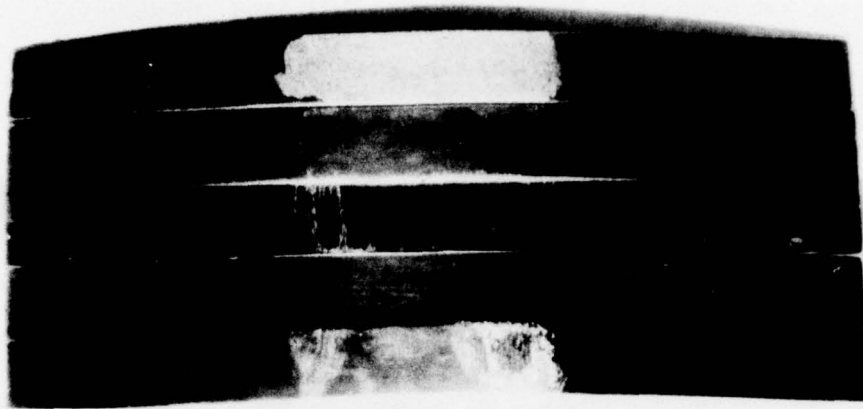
shows the typical appearance of stress corrosion specimens mounted in the holder. After stripping the chromium-molybdenum coating in hydrochloric acid, the specimens were cleaned, chemically polished, and inspected for cracks using both visual and fluorescent penetrant techniques. Figure 26 shows the appearance of several specimens tested at 413.4 MN/m² (60 ksi). The cracks were readily visible after fluorescent penetrant processing when examined under ultraviolet light. Tables 14 and 15 summarize the results of these tests. Referring to Table 14 the uncoated alloy had, as expected, a threshold stress for cracking somewhere below 275.6 MN/m² (40 ksi). Plating this alloy with chromium-molybdenum improved the HSSC resistance so that the threshold stress was raised to above 413.4 MN/m² (60 ksi). After diffusing the coating at either 760°C (1400°F) or 870°C (1600°F), the threshold stress was again reduced to below 275.6 MN/m² (40 ksi). Glass bead peening (5N2) did not appear to affect the results of the specimens diffused at 760°C (1400°F), but did improve the threshold stress for specimens diffused at 870°C (1600°F).
